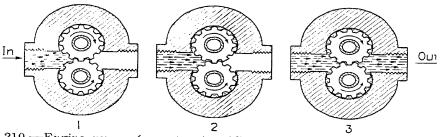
Engine pump (gear type). (Courtesy of Eastern Air Lines, Inc.)
